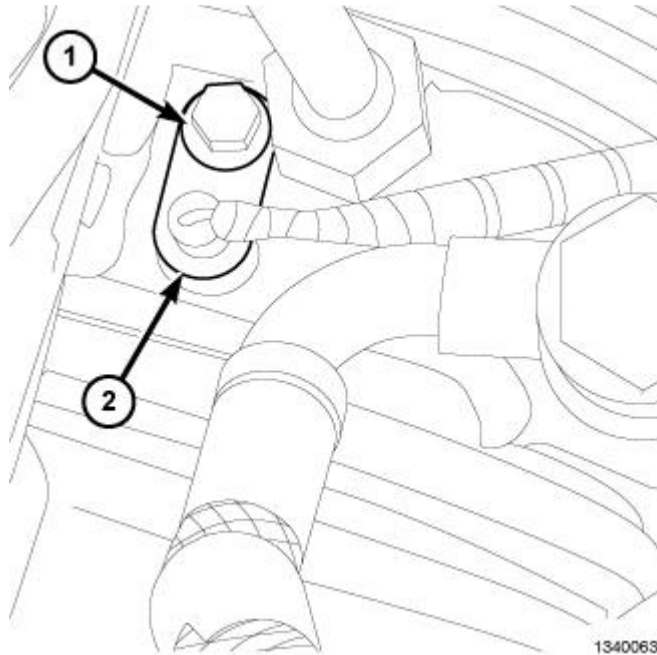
Identifying Turbocharger Speed Sensor Attaching Bolt & Turbocharger Speed Sensor
